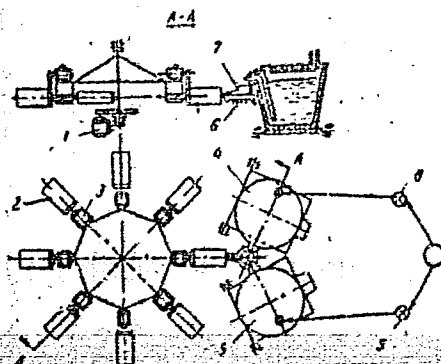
1--drive for the rotating assembly; 2--metal casting mold; 3--drive for the molds; 4 and 5--hermetically sealed ladles; 6--electromagnet; 7--guide trough; 8--regulator valve for ladle 4; 9--regulator valve for ladle 5
